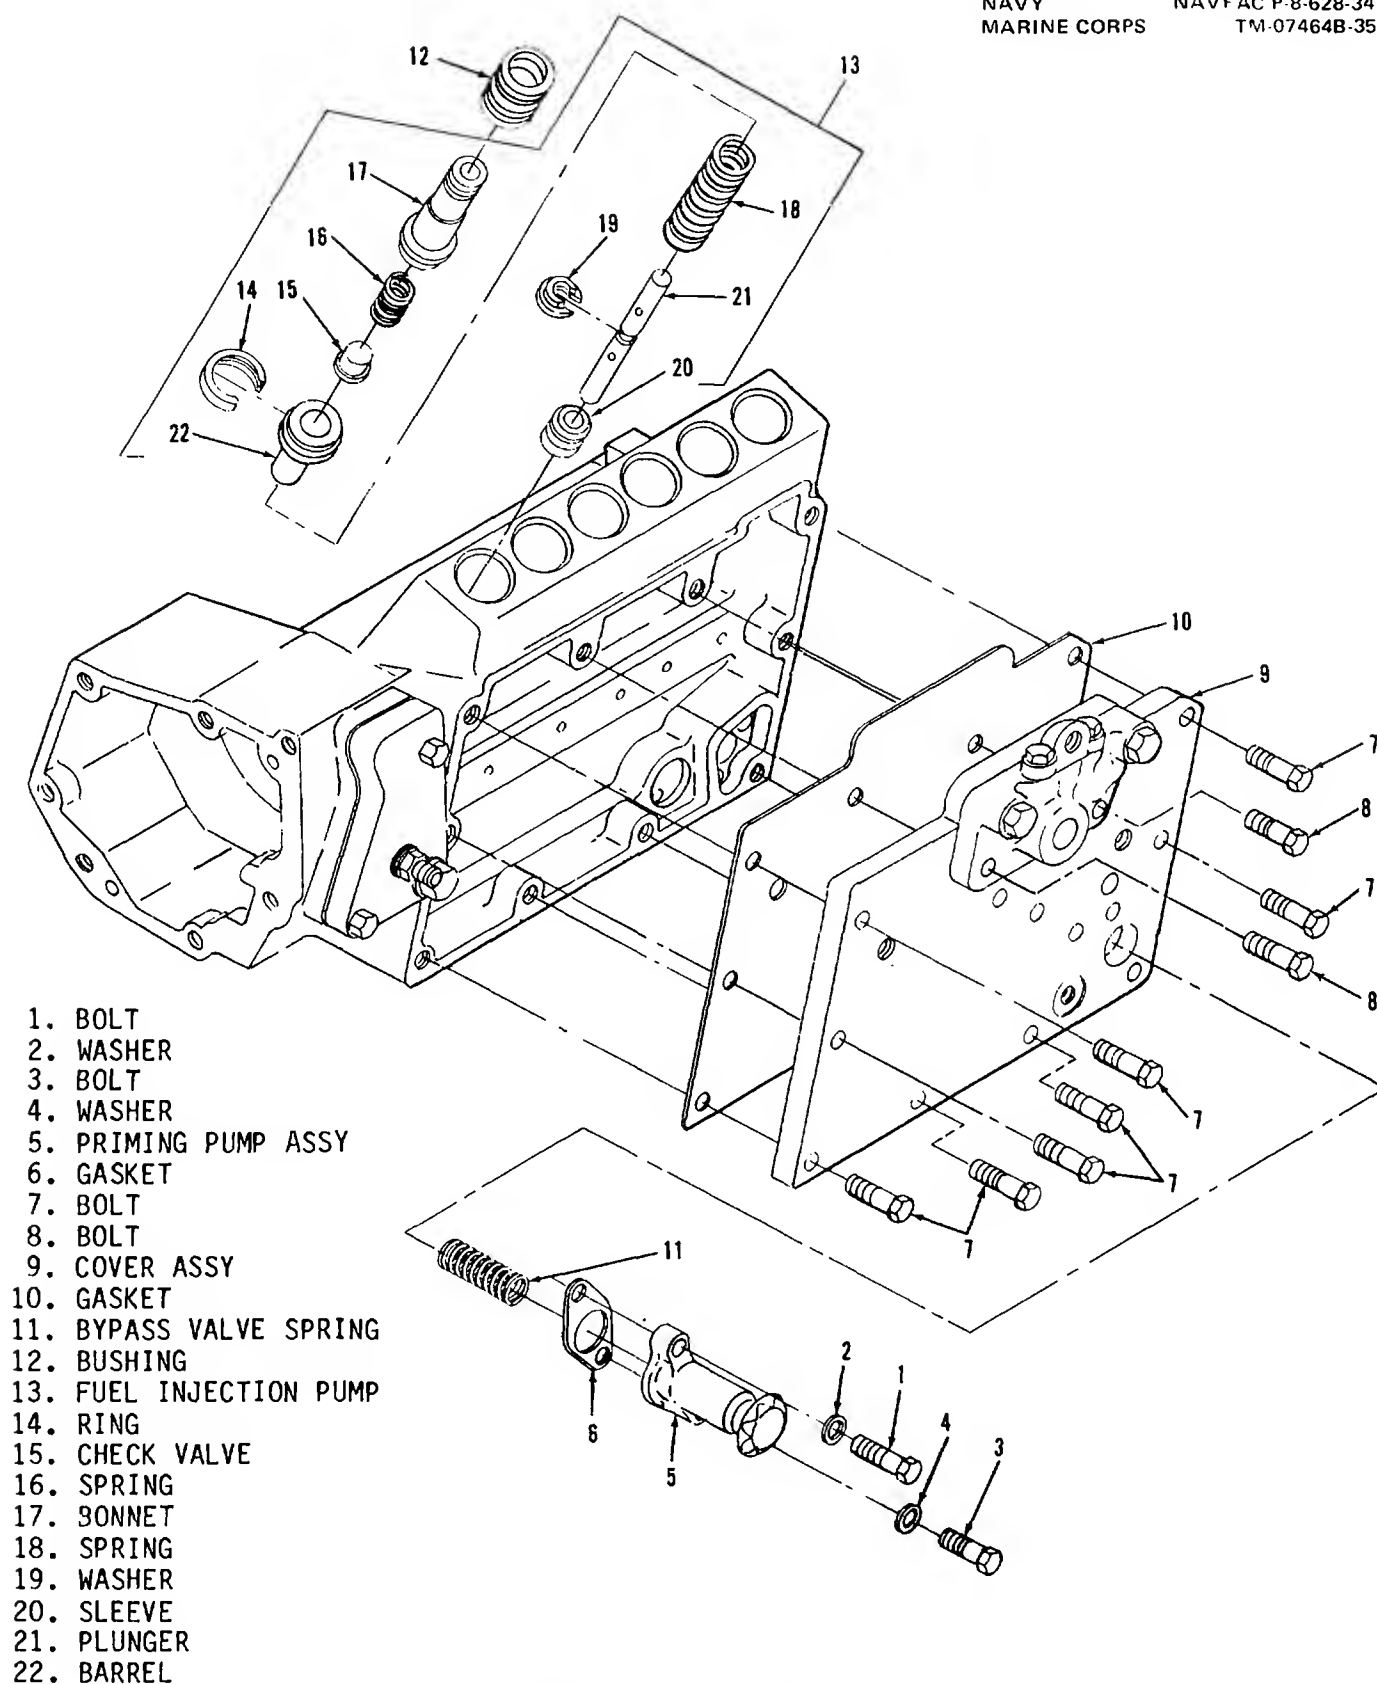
Removal and Disassembly of Fuel Injection Pumps
